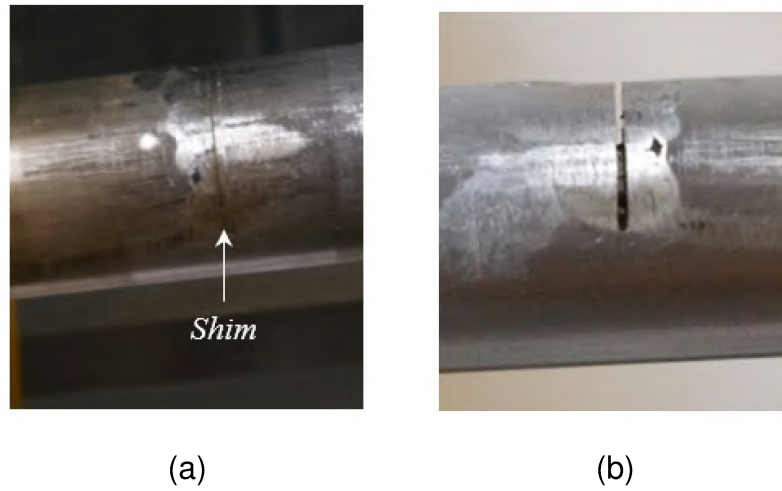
Crack conditions: (a) breathing crack; (b) open crack.
